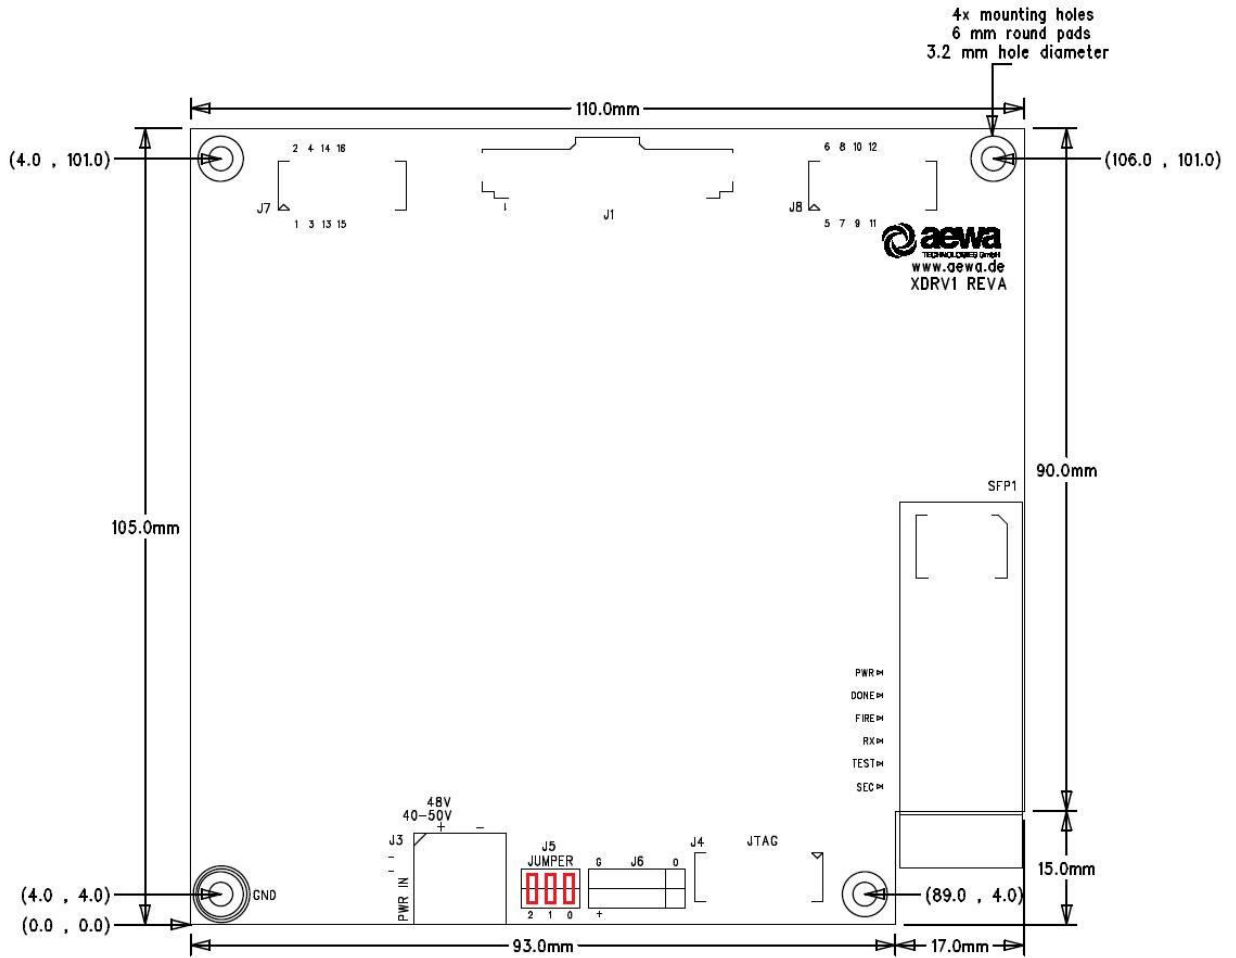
XDRV1 MECHANICAL DIMENSIONS
